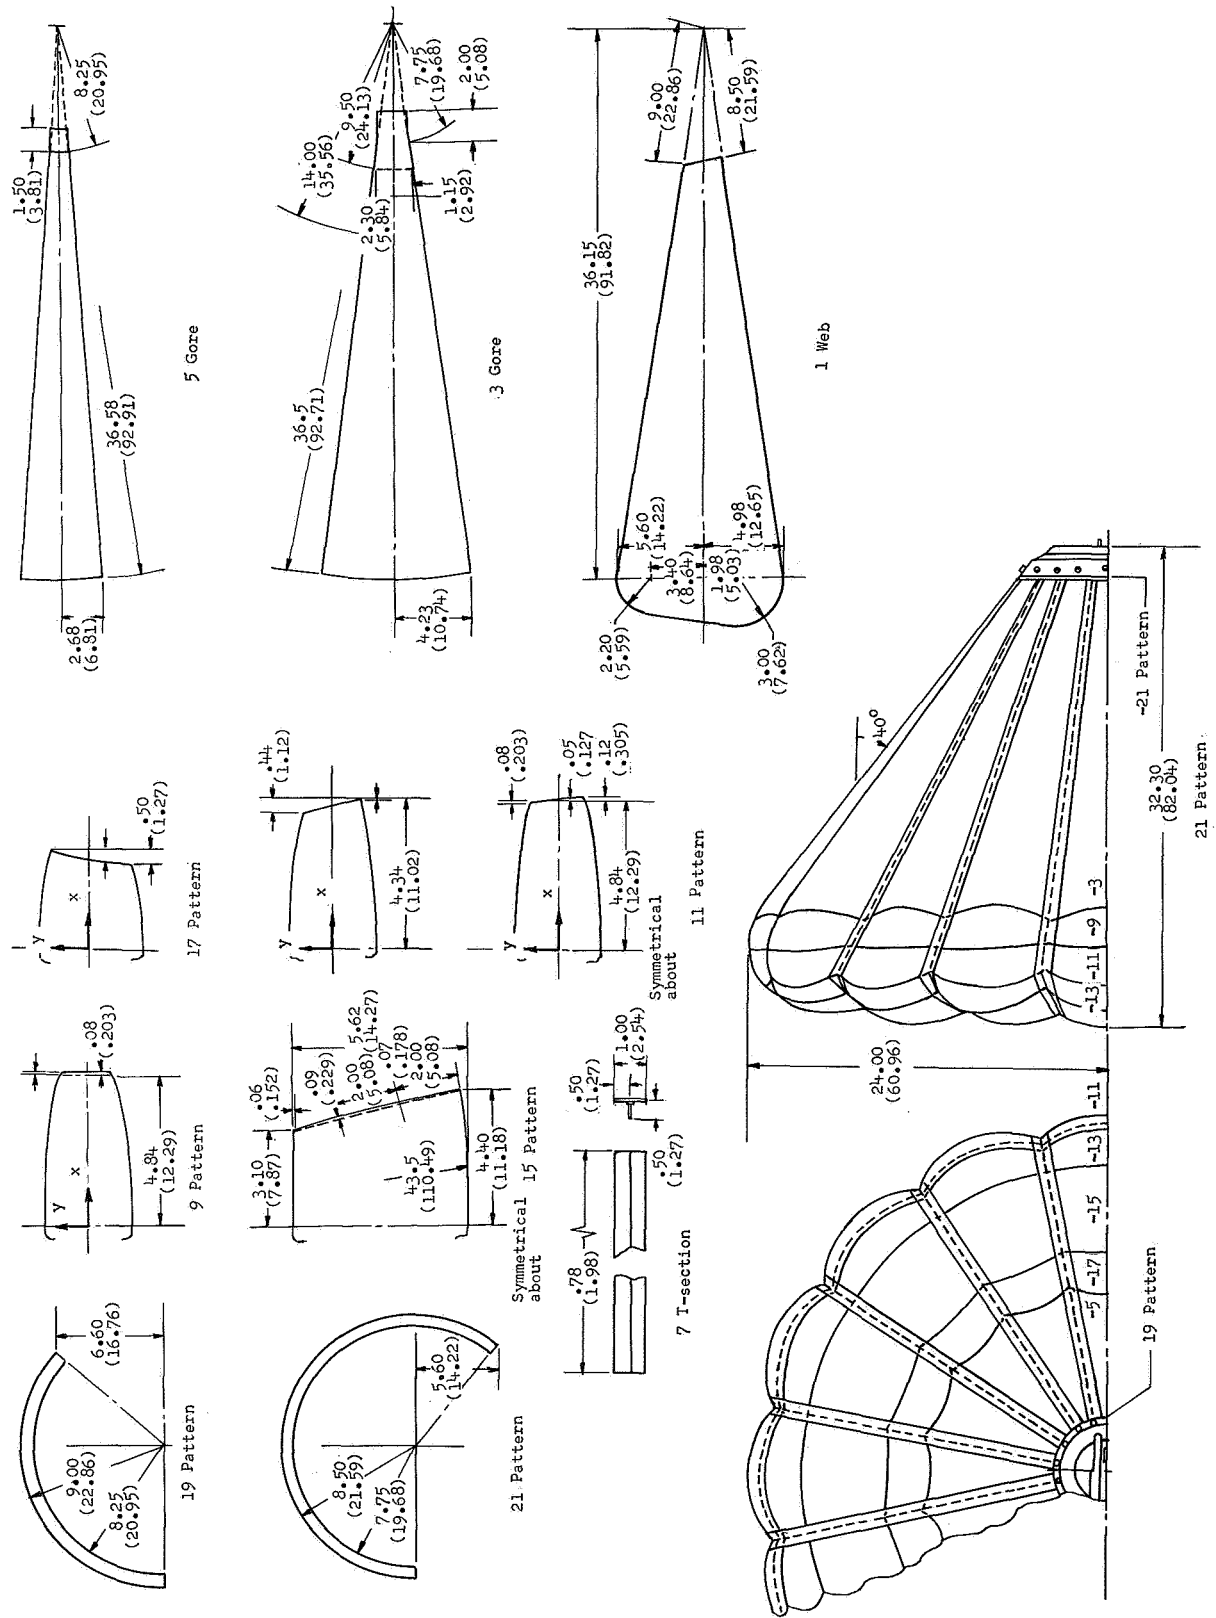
Sketch of decelerator and component patterns. Dimensions are in inches (centimeters).
